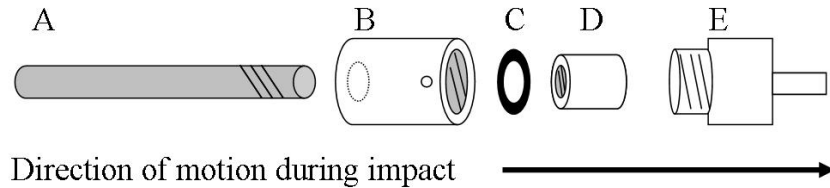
Schematic of shock adapter. A. Shaft of piston, threaded on the end closest to the point of impact. Piston housing not shown. Threading matches with part D. B. Outer shock adapter housing, with opening on left side to allow shaft to slide through and threaded opening on the right side. Threading matches E. C. Shock absorbing O-ring. D. Anchor for upper housing, threading matches A. E. Load cell assembly, threading matches B, threads so that the o-ring (C) is pressed between B and D.
